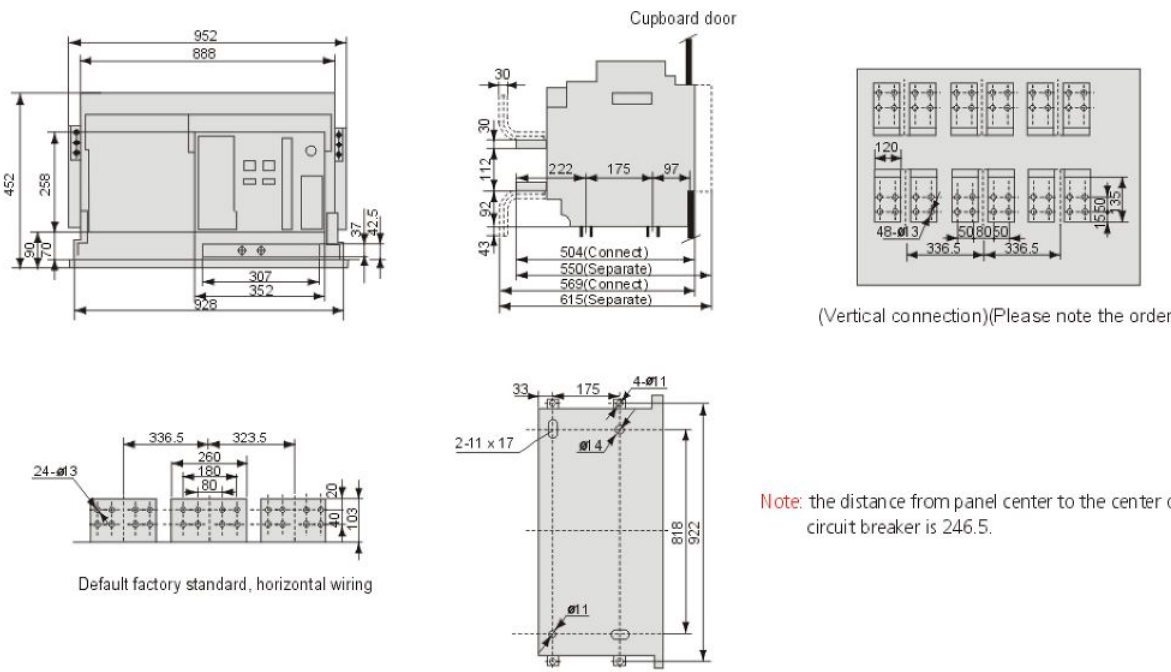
Overall and installation dimension of (ASW1-6300 In=6300A) drawer type circuit breakers
